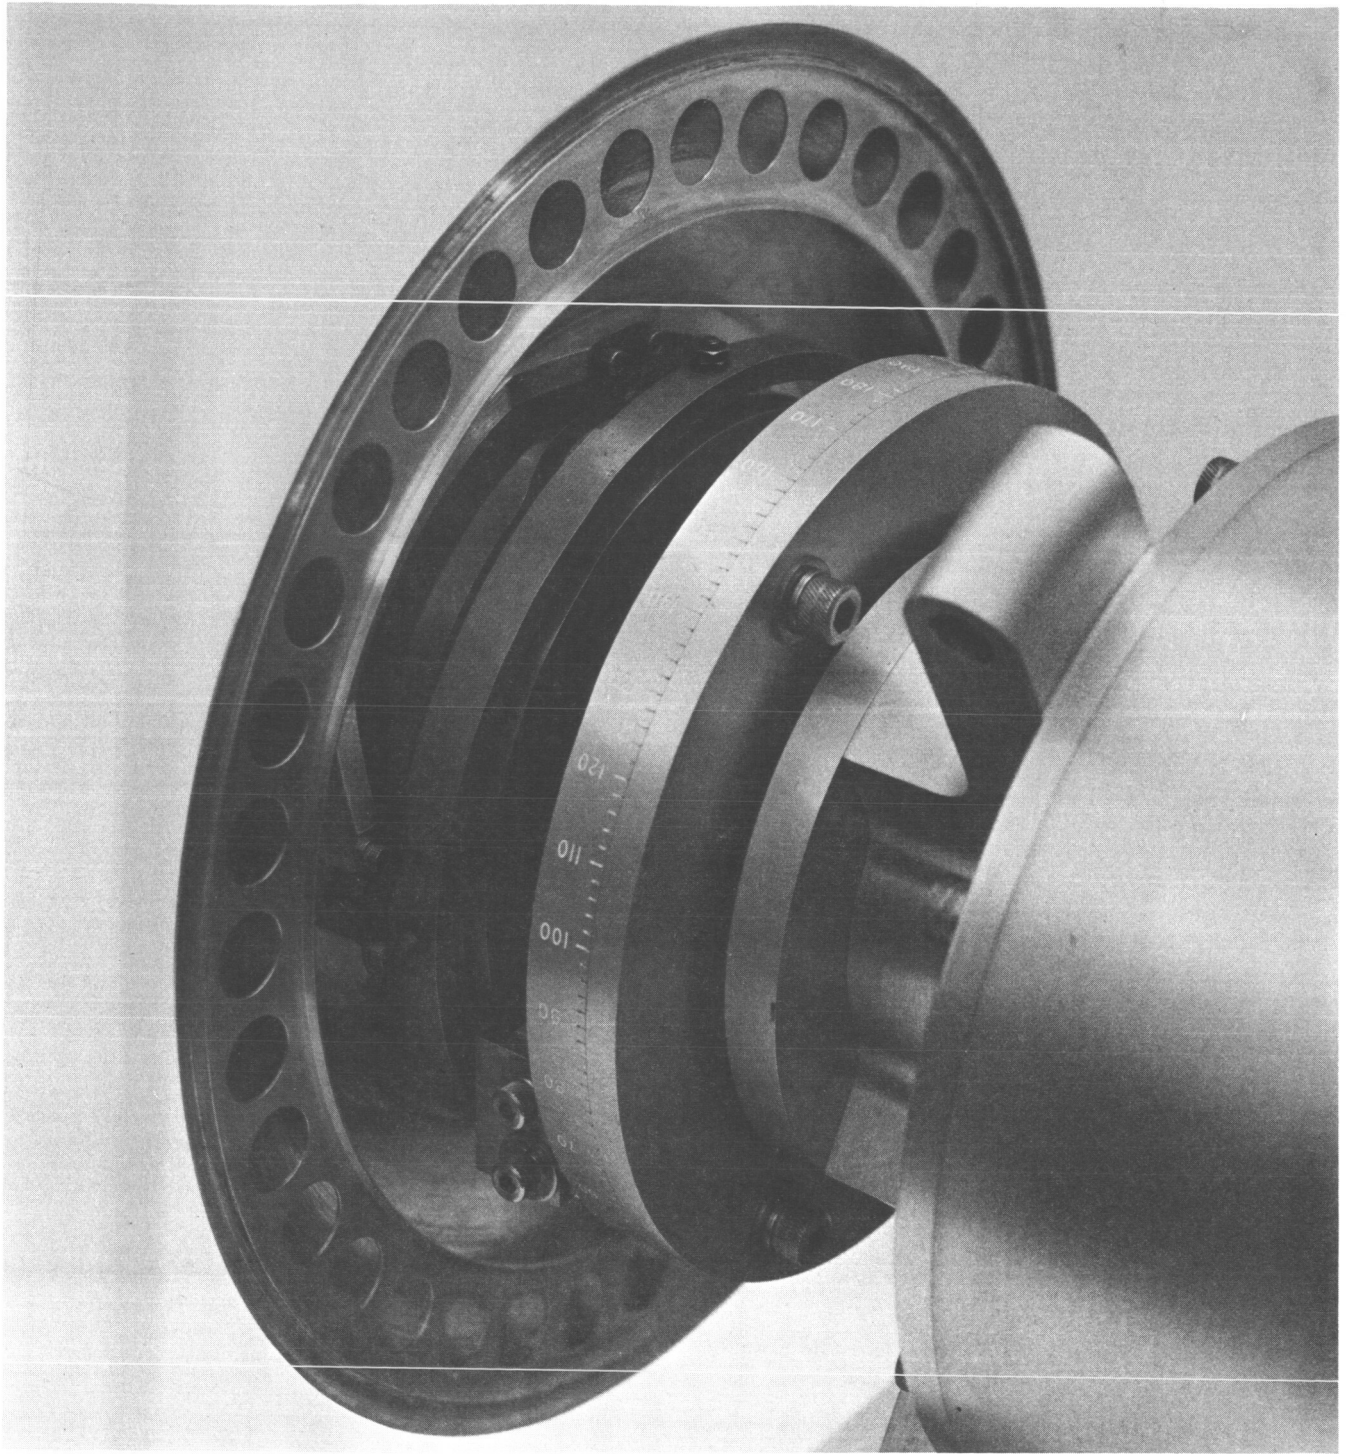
Back view of subdish assembly showing mirror stiffening ring, bearing holders, cam follower, cam wheel, counterweight, indexing plate, and tripod head
